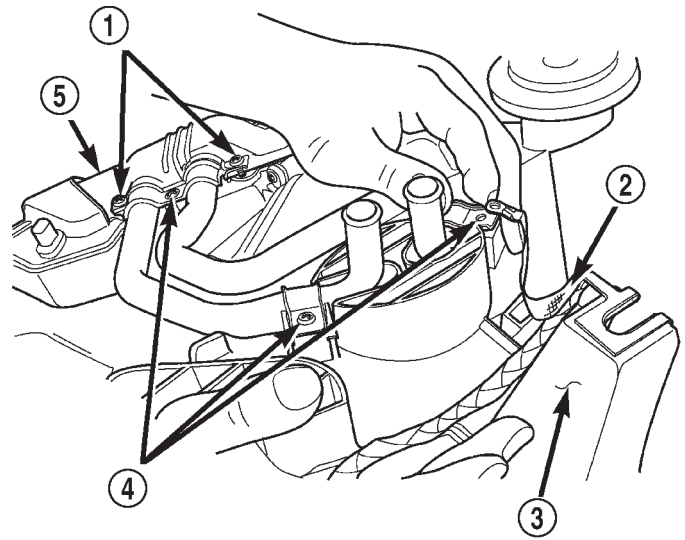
HEATER CORE, TUBES, AND RETAINERS
